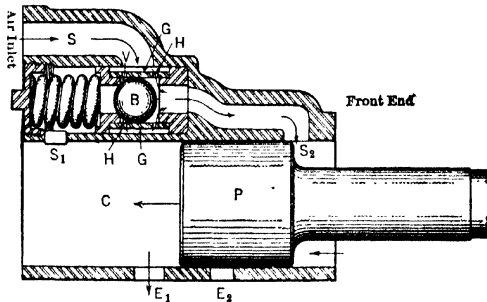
Valve Mechanism of "Hammer" Drill (Diagrammatic).
